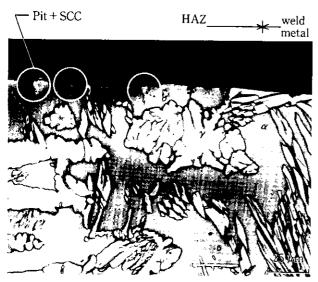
A cross sectional view of a shielded metal arc girth weld joint (White part, austenite; dark part, ferrite. Micro cracks initiated from the related pit bottom were located in the HAZ)
